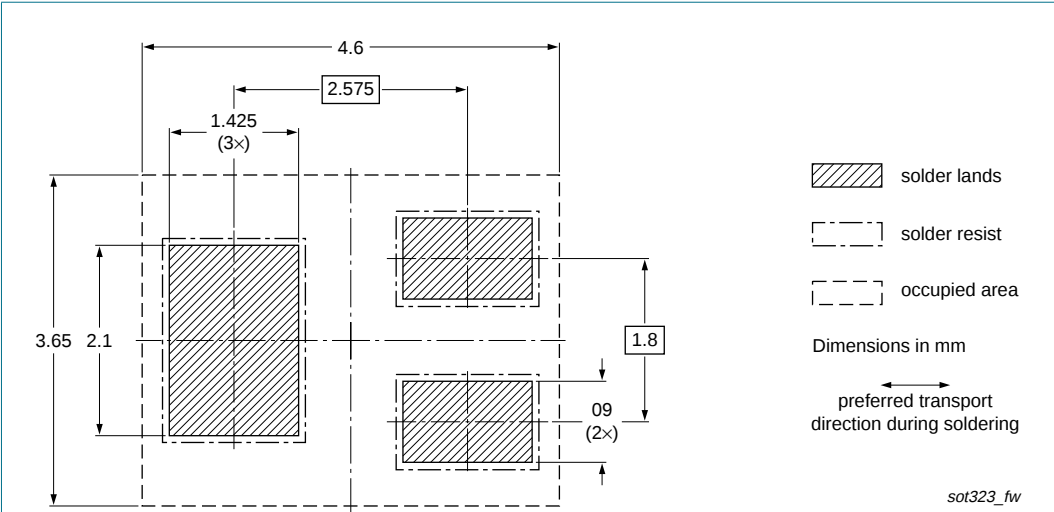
Wave soldering footprint BAS16W (SOT323/SC-70)
